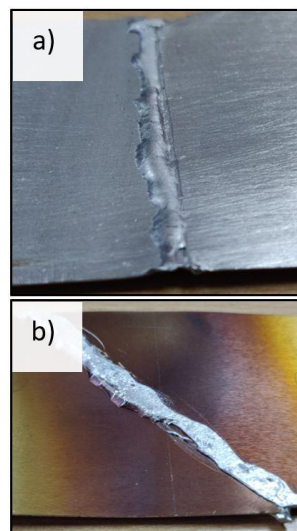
Aluminium strip soldered joints: a) butt joint (brushed and acetone cleaned) b) scarf joint
